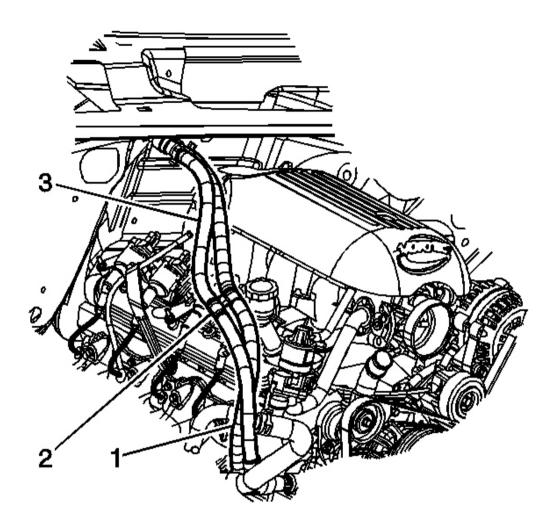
Heater Inlet Hose & Mounting Clip Courtesy of GENERAL MOTORS CORP.
